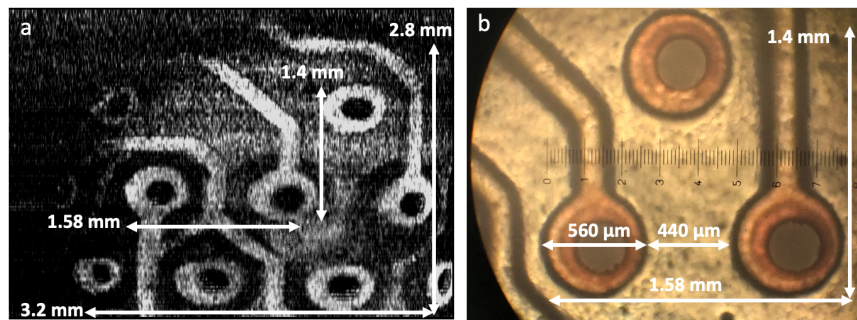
a) PCB front-view OCT image showing a field-of-view of  $\approx 3.2 \times 2.8 \text{ mm}^2$  that can be obtained with the GRIN2913 b) PCB under microscope to correlate the dimensions.
